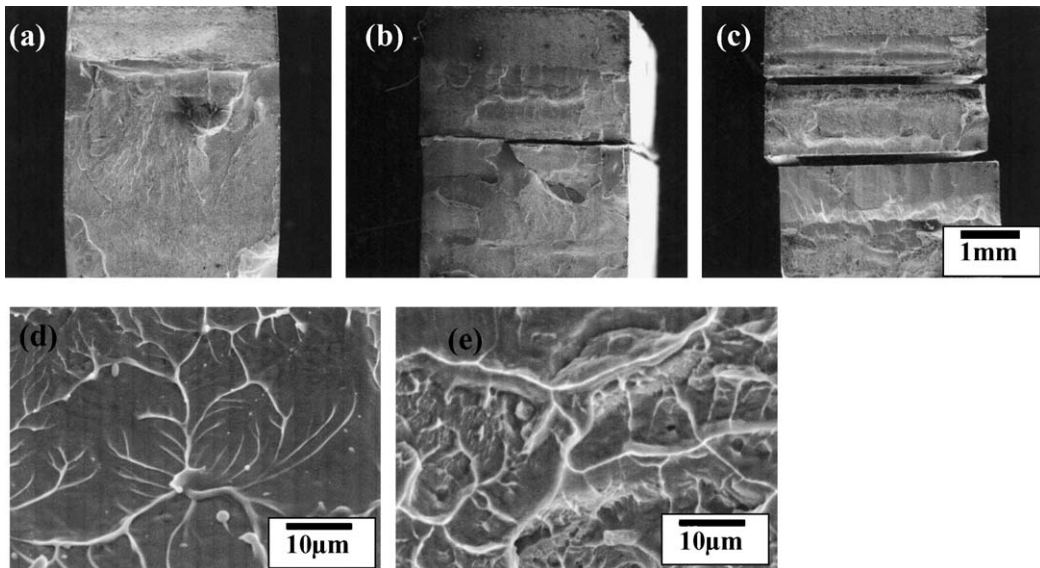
Cross-sections of specimen following fracture tests for (a) monolithic, (b) two, and (c) three BMG composites, (d) and (e) are enlargements of fracture surfaces.
